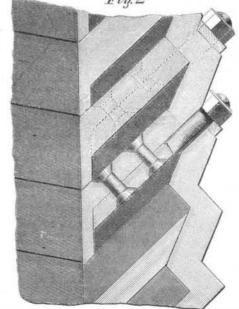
is a sectional elevation of part of a shin's side or other structure, in which the foundation plate
